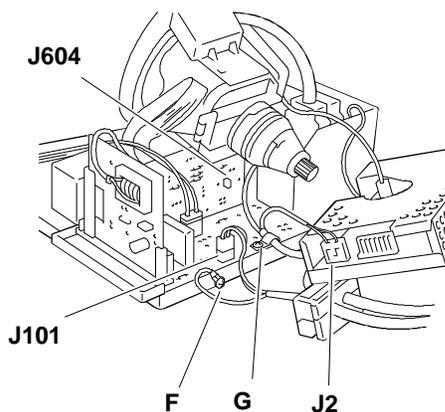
Removal of Video Signals Cable and Power Cord
